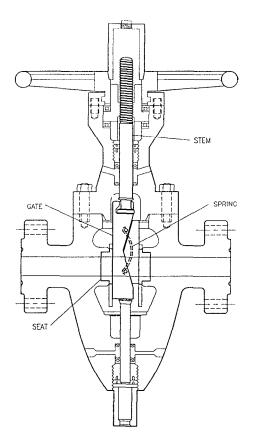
Schematic drawing of a valve showing common Alloy 718 components used in corrosive service.
